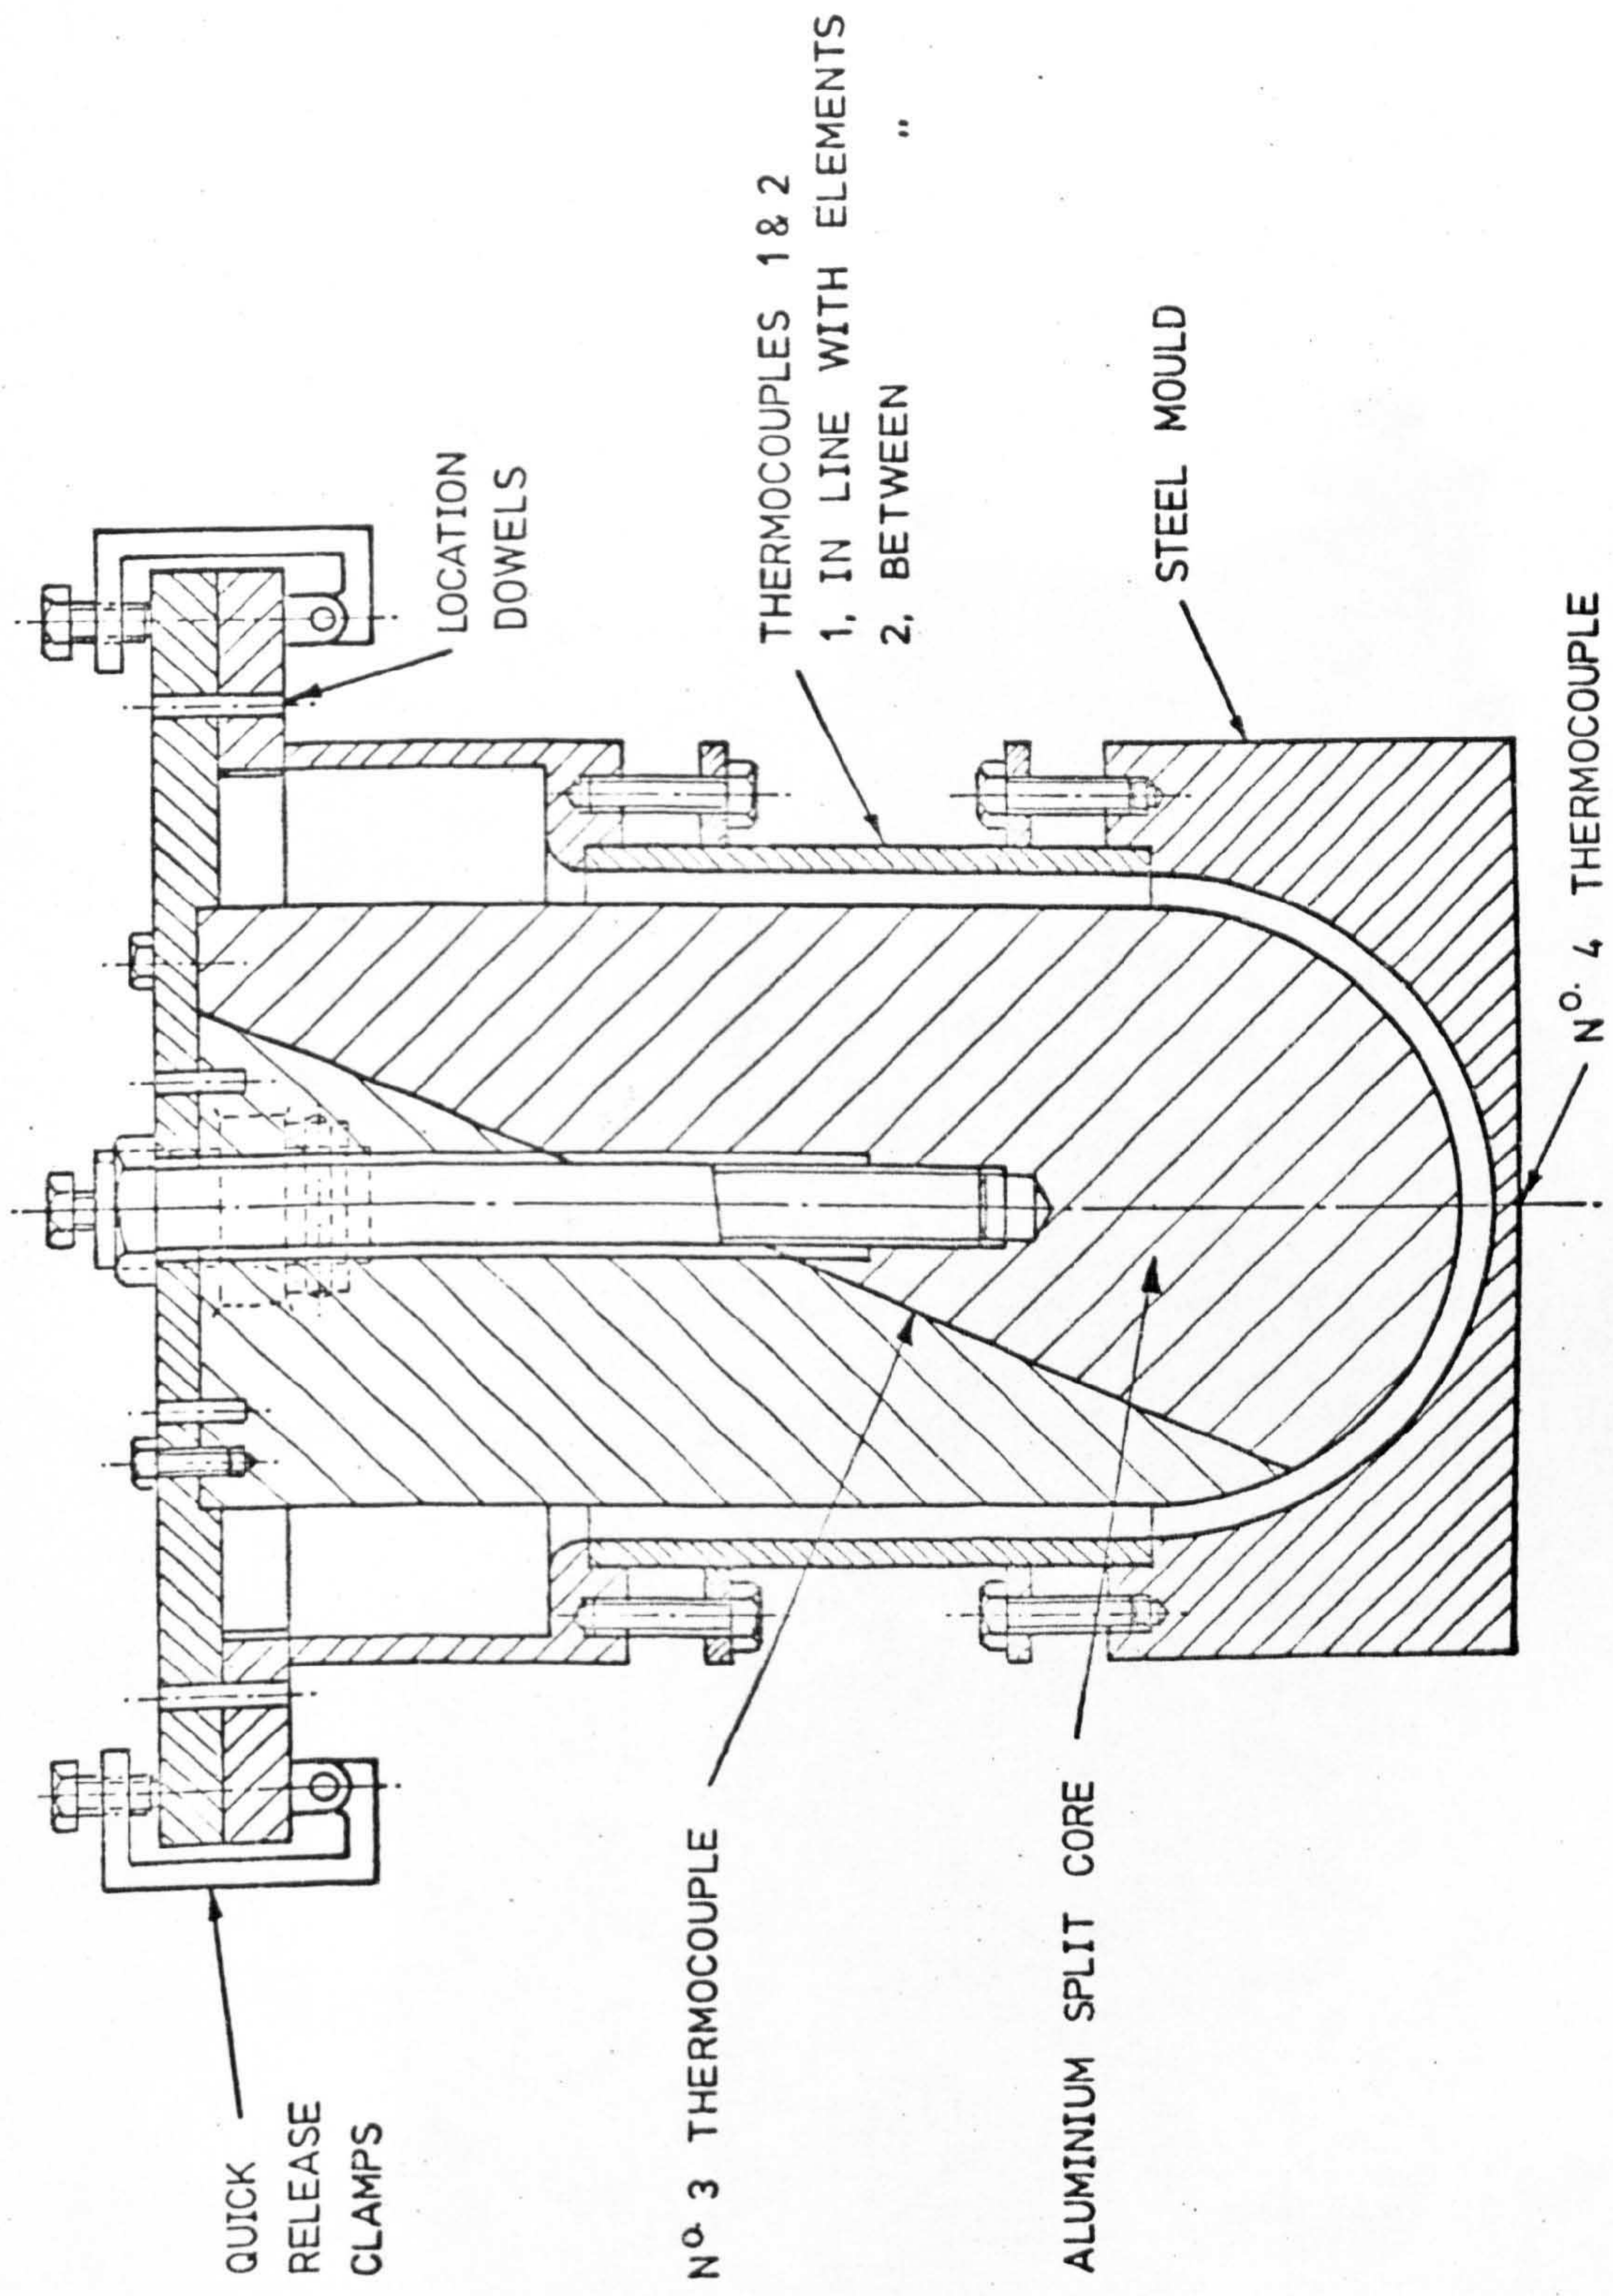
(a) THE PRESSURE VESSELS MOULD
